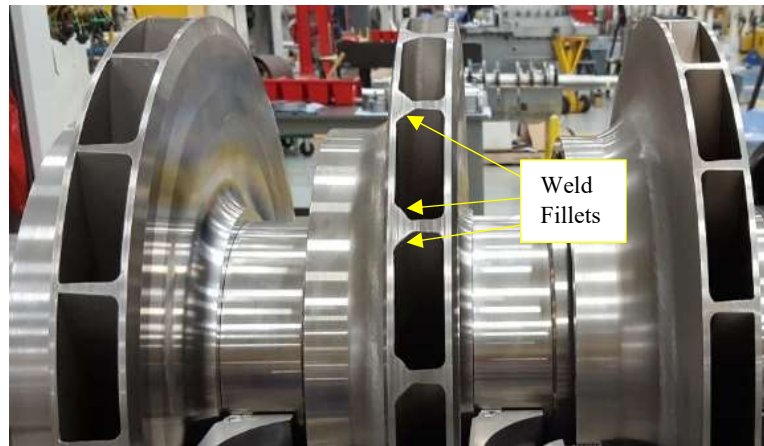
Fillet welded impeller (center) compared to EB-welded impellers
